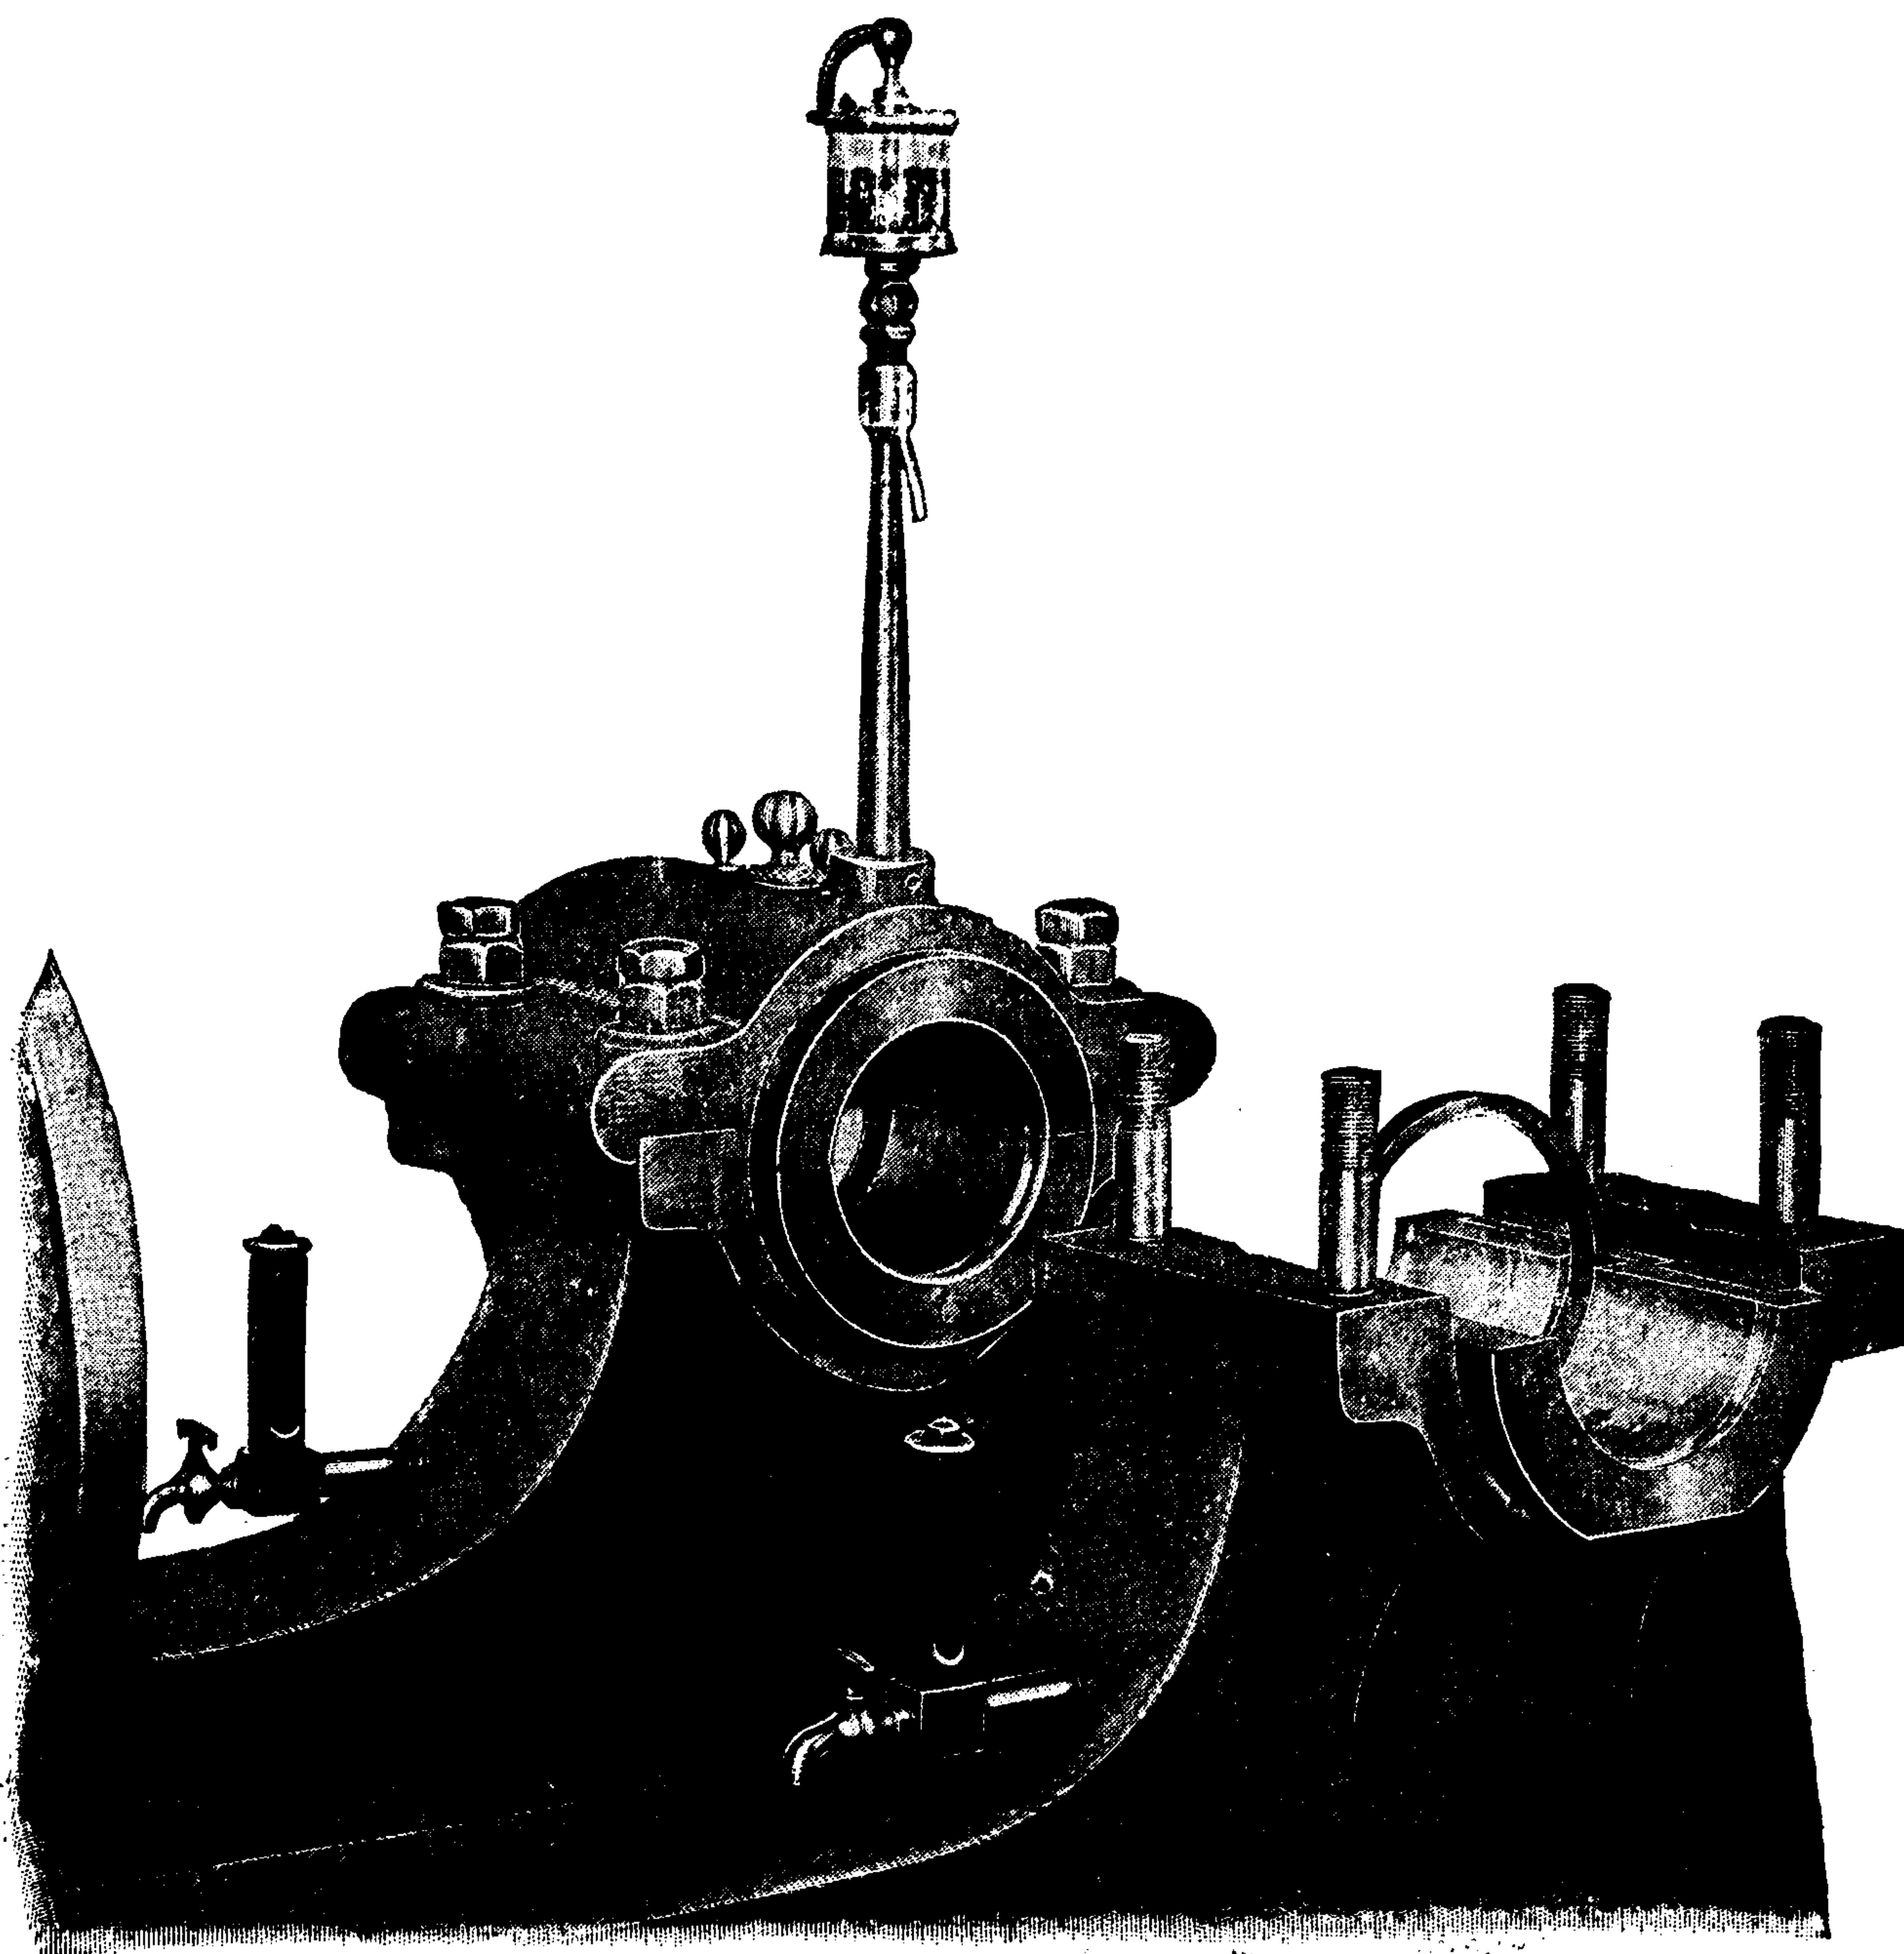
THE BRONZE BEARINGS AND RING OILERS.
